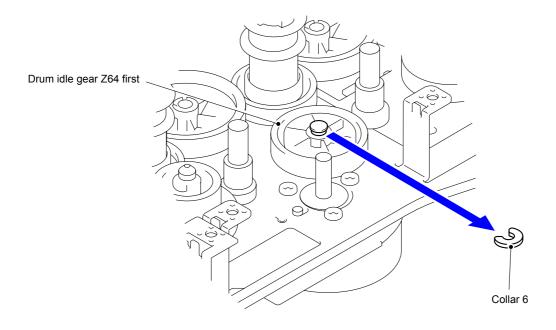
Gear position: Refer to "Top drive ASSY."
